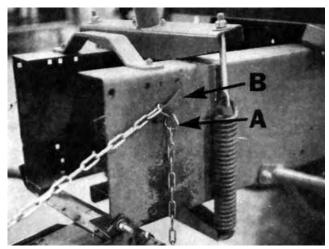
Bale Chute Chain Assembly: (A) Deformed Chain, (B) Bale Chute Hook.
